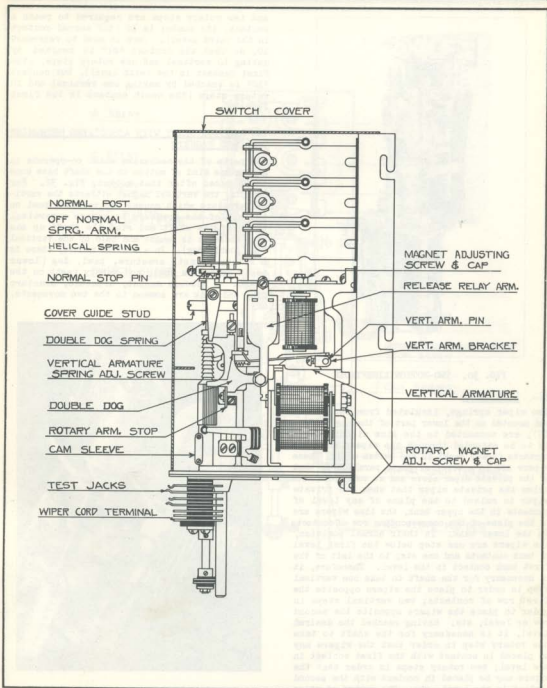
SELECTOR SWITCH, RIGHT VIEW
